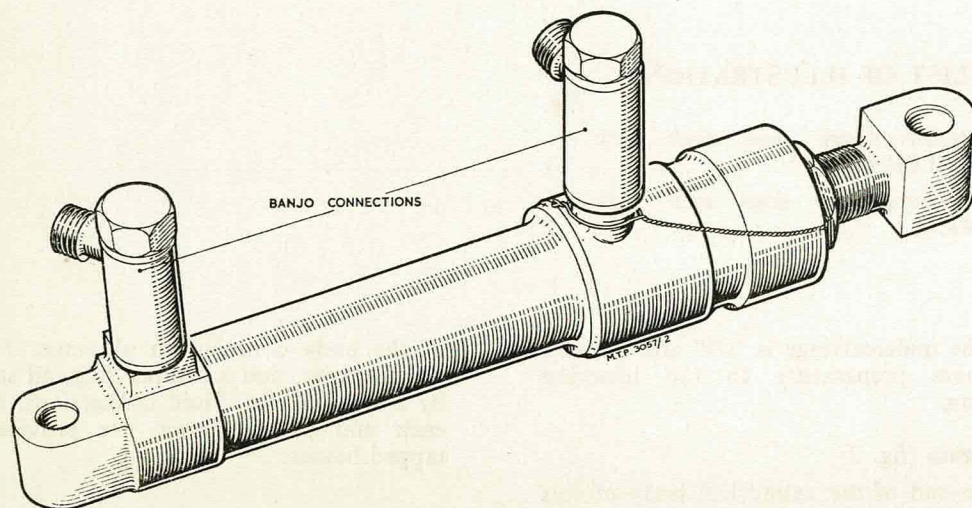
Main undercarriage door lock jack assembly 1.01076.001
